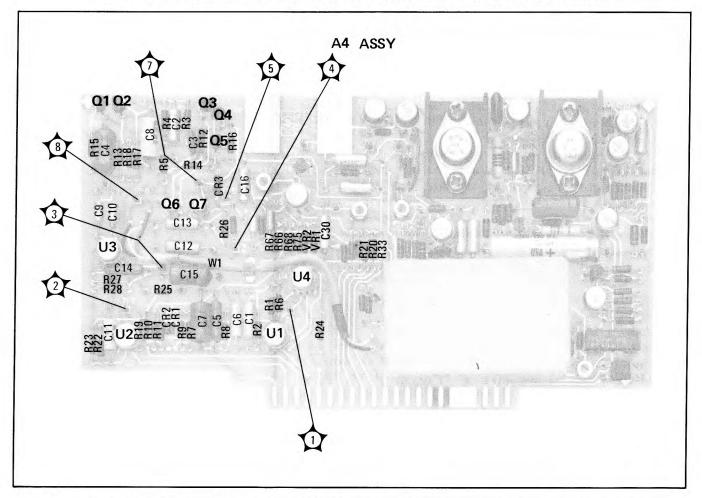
P/O A4 Assembly (DC Ampl/Sync Detector) Component and Test Point Locations
